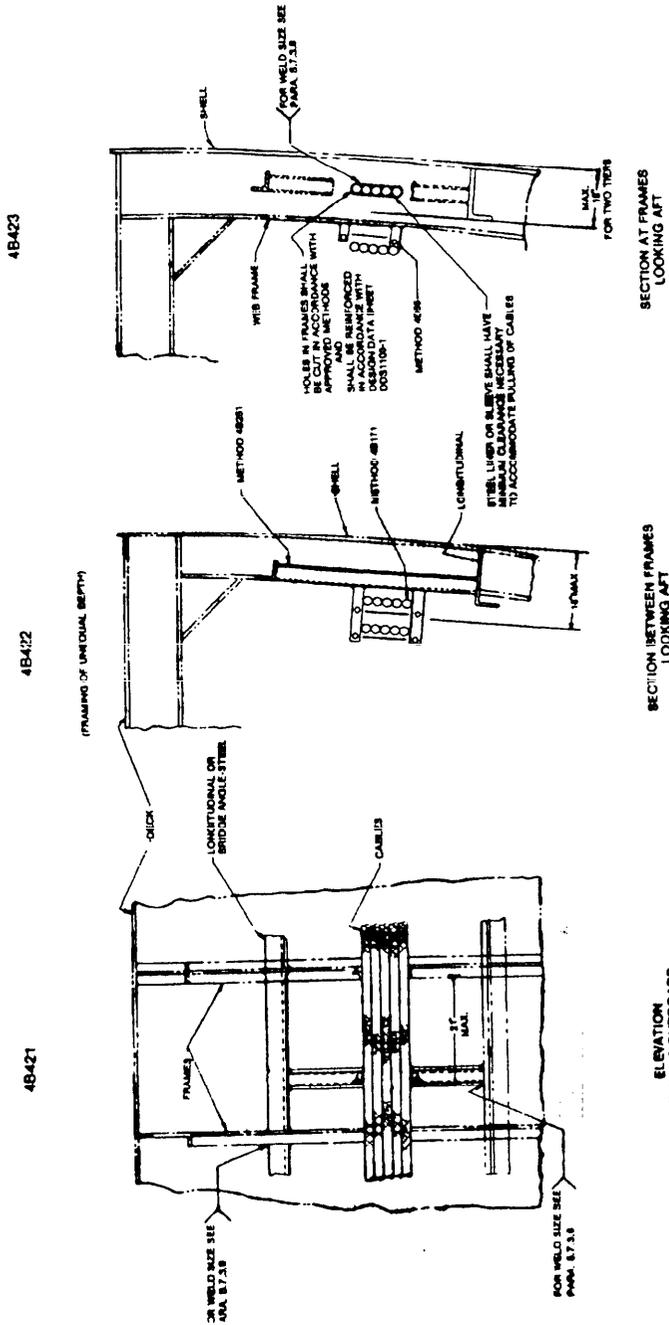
B42. Cable support for degaussing cables (surface ships).
